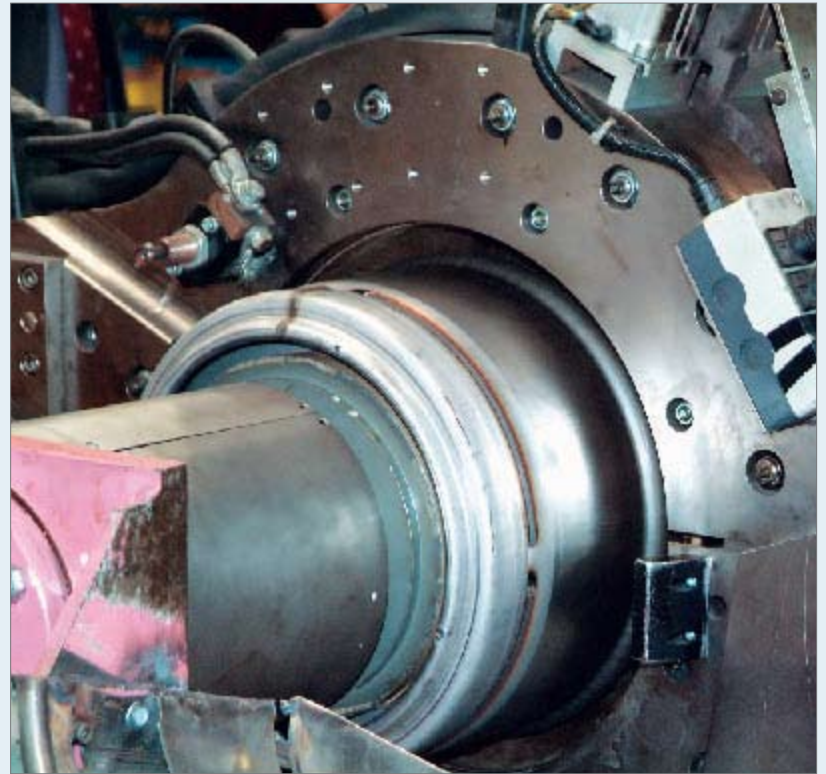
The final step in the production line. Automatic TIG welding of the two barrel halves. Full penetration I-joint welded without filler material. Shielding gas Ar/6% H₂. The weld quality meets the ISO 5817 C standard for the food industry, amongst others. This stipulates a flat, smooth and easy-to-clean weld on the inside, so as to avoid accumulation of beer residues. These essential qualities are provided by the shielding gas.
